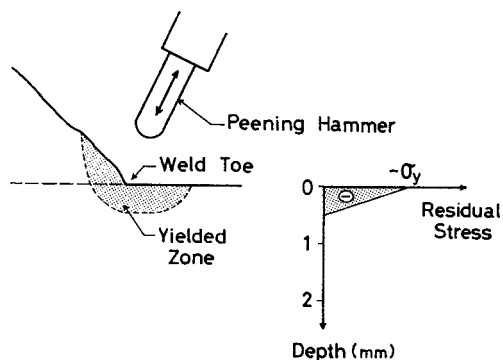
Model of Surface Residual Stresses at Fillet Weld Toe Induced by Peening.
